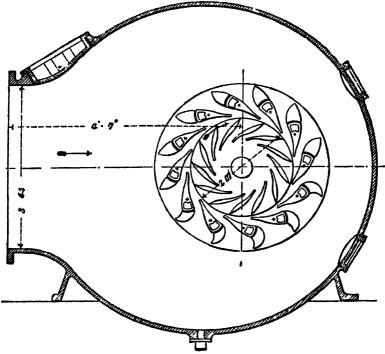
Section through wheel and guide blades of Mixed Flow Turbine.
